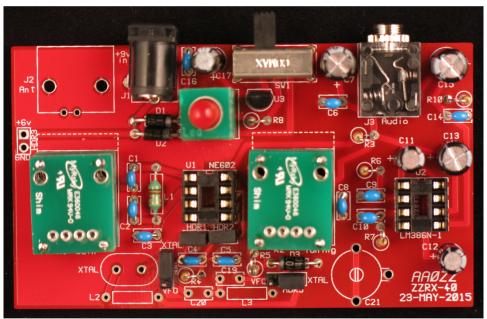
Four Corner Wires on Front Side - Soldered
